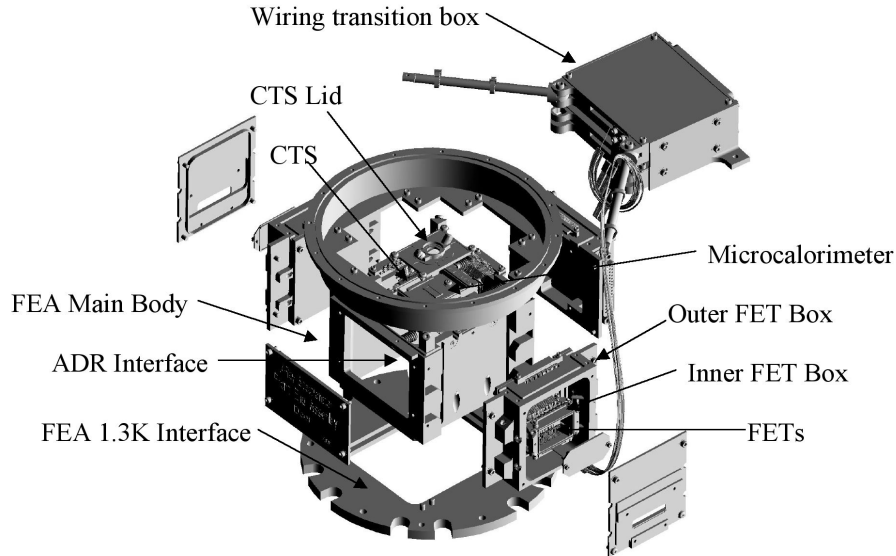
Exploded view of the XRS Front End Assembly (FEA).
